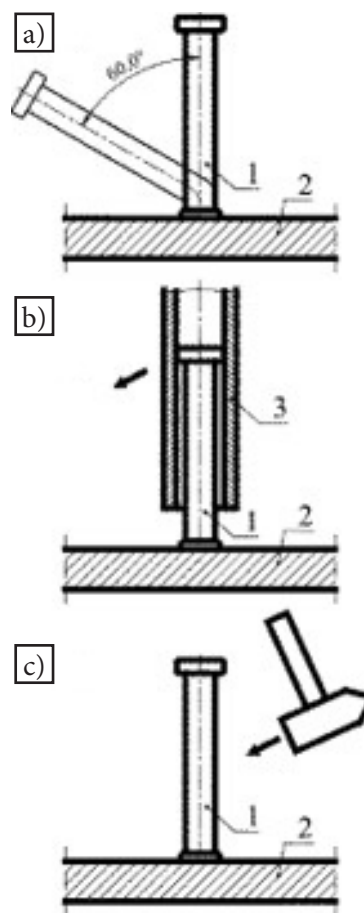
Schematic diagram of a bend test of shear connectors: a) performed using a dynamic load (hammering); b) performed using a tubular device; c) final result; where: 1 – shear connector subjected to bending; 2 – base (steel sheet); 3 – tubular device; individual study based on publications [6, 11]
